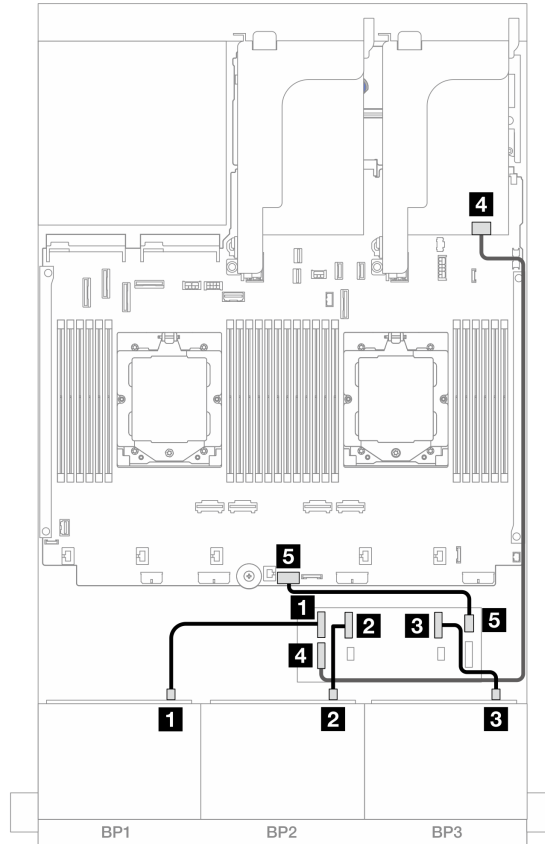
SAS/SATA cable routing to CFF expander and 16i adapter
